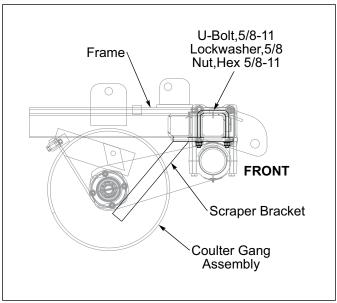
7 & 9 Shank Machine Scraper Side View
